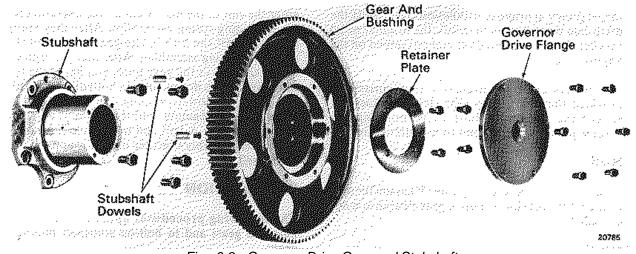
Governor Drive Gear and Stubshaft governor drive gear is used to drive the water pump and the governor drive assembly. Since the "dummy"
